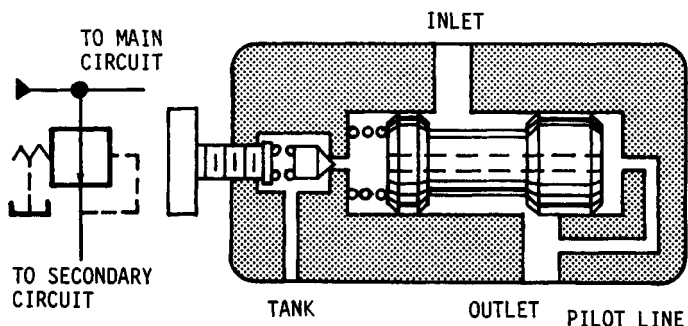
Pressure-reducing valve allows one branch of a circuit to operate at a lower pressure than the main system. (From Ref. [43.1].)
